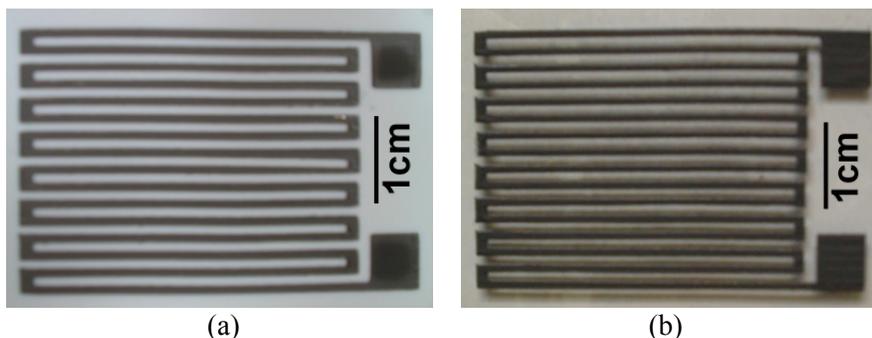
The stencil-printed nanoscale silver pattern on alumina (a) and that on glass (b) before sintering.
